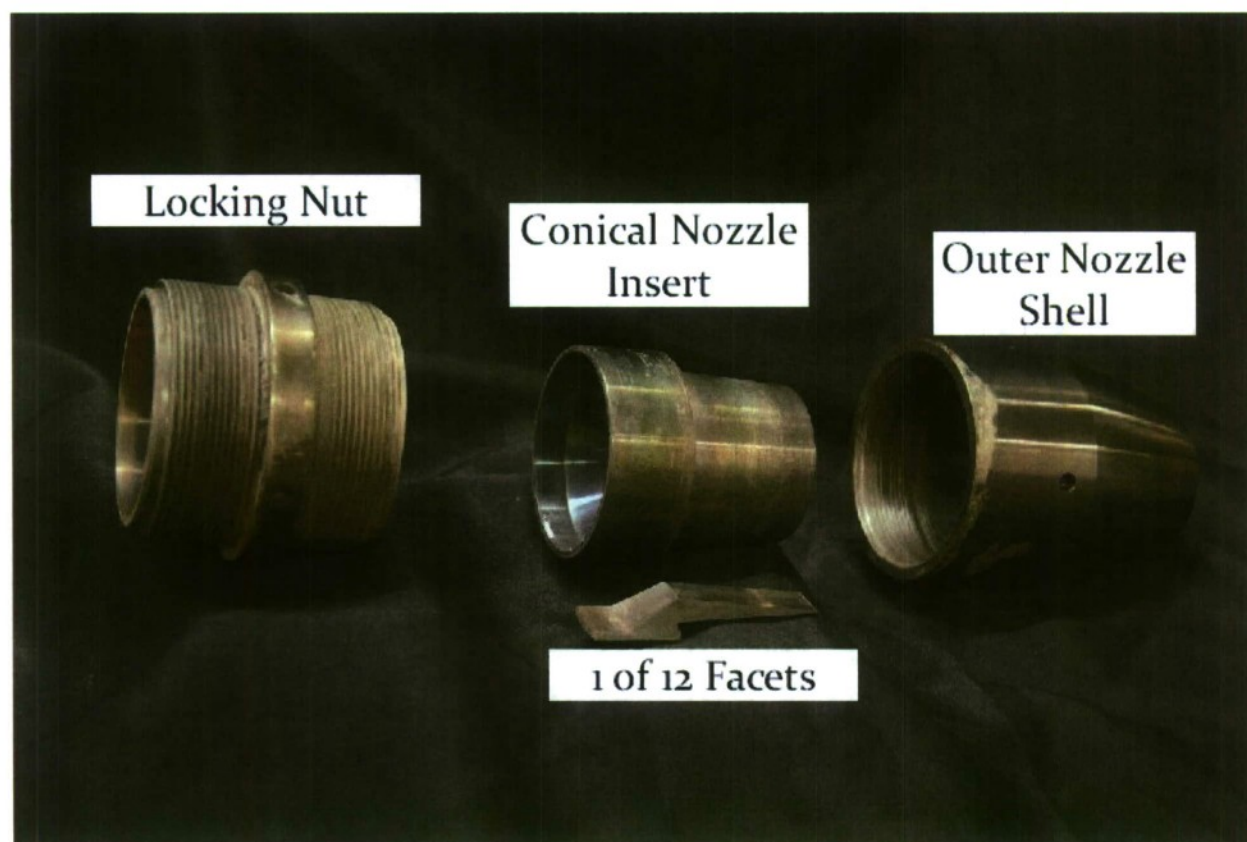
Nozzle assemble showing the outer shell, insert (solid conical and segmented facets), and retaining ring.
